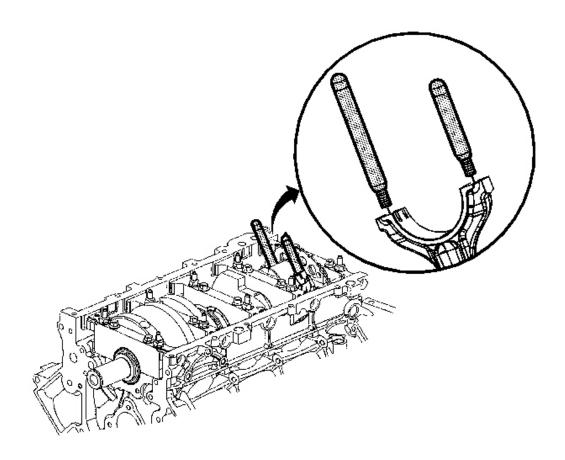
Installing Piston & Connecting Rod Assembly Courtesy of GENERAL MOTORS CORP.
